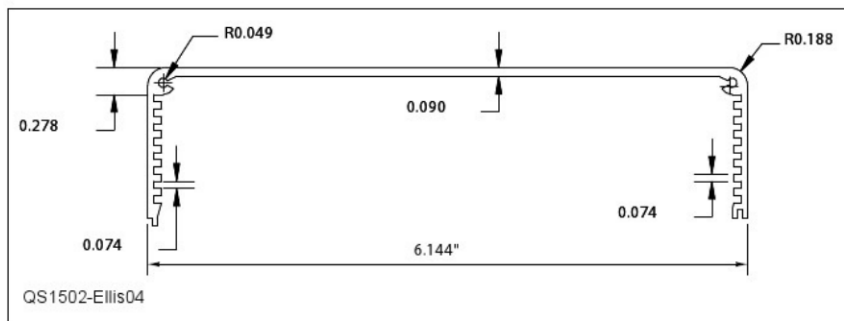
Drawing detail of split body extruded aluminum enclosure (various sizes available).
